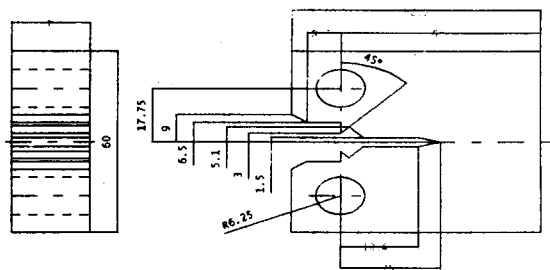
Geometry and sizes of CT type specimen for plane-strain fracture toughness test.
